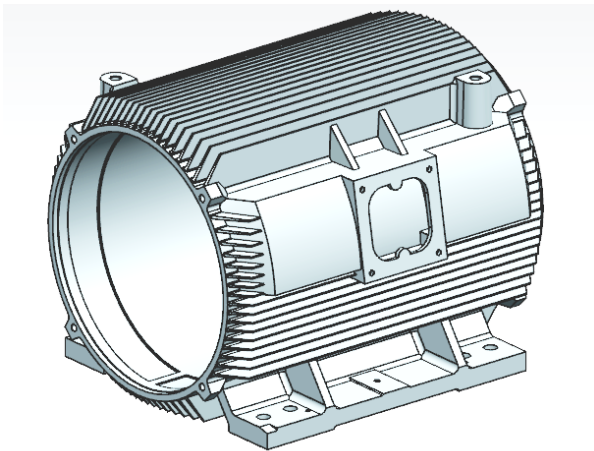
Shows the existing frame of 315L motor for 160 kW 4 pole motor
